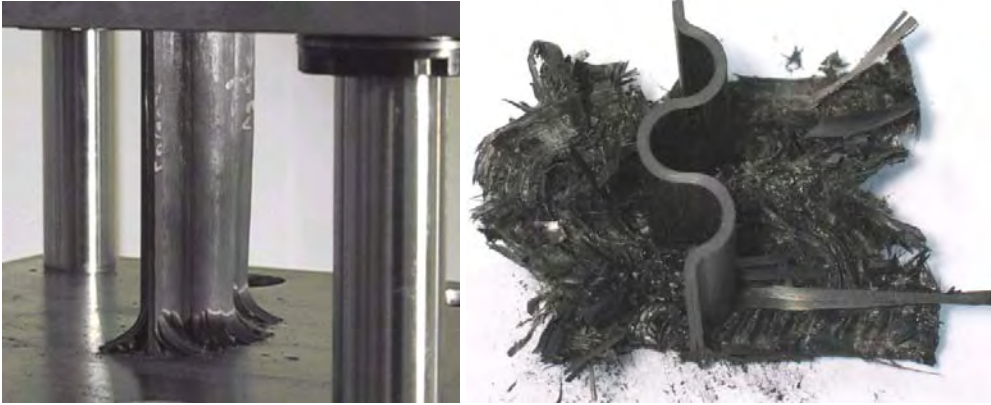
Corrugated plate specimen ready for testing in the test fixture, and close-up after crushing.
